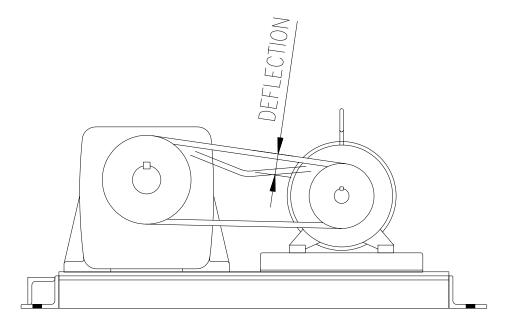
Drive assembly showing measurement of v-belt deflection. (Guards removed for illustration only.)
